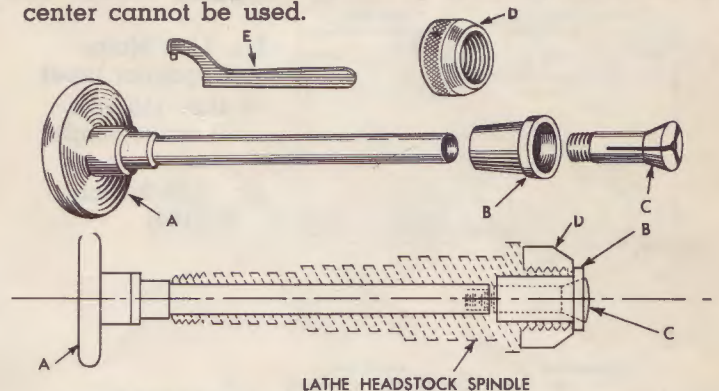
DRAW-IN COLLET ATTACHMENT
